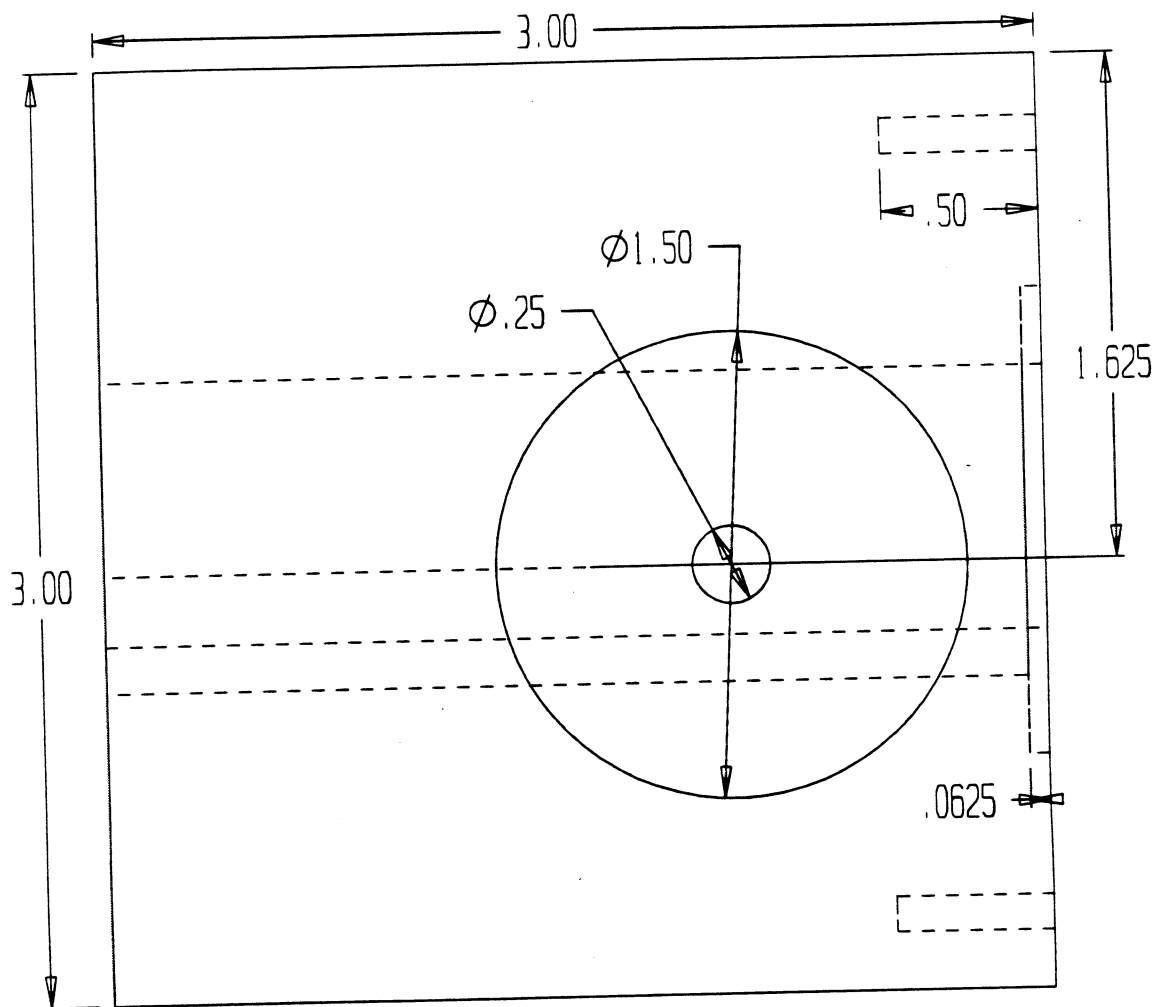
Segment 2 - Machine Drawing - Bottom View
